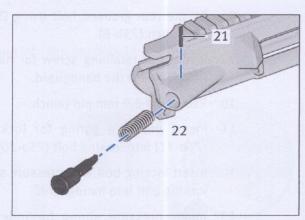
Forward assist, pressure spring and clamping sleeve
